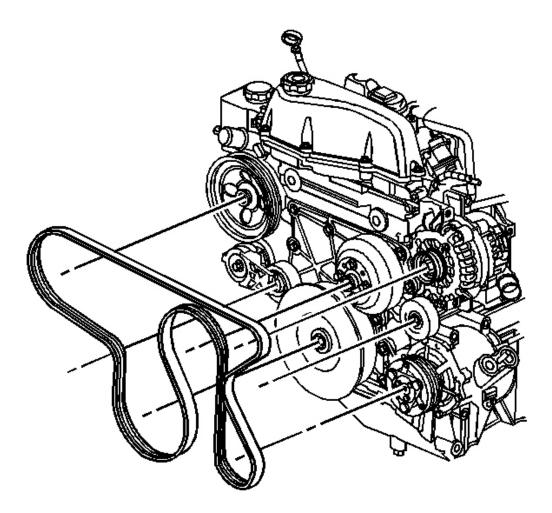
View Of Drive Belt Courtesy of GENERAL MOTORS CORP.
